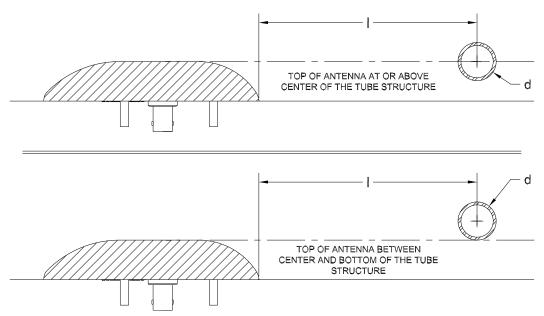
Example Teardrop Footprint Antenna Mounting Under Fabric Skin
